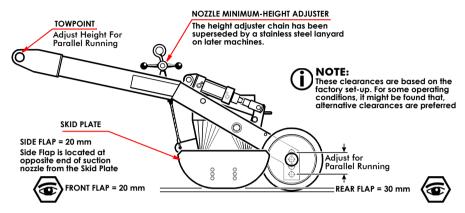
Suction Nozzle Clearance - Factory Set-up
